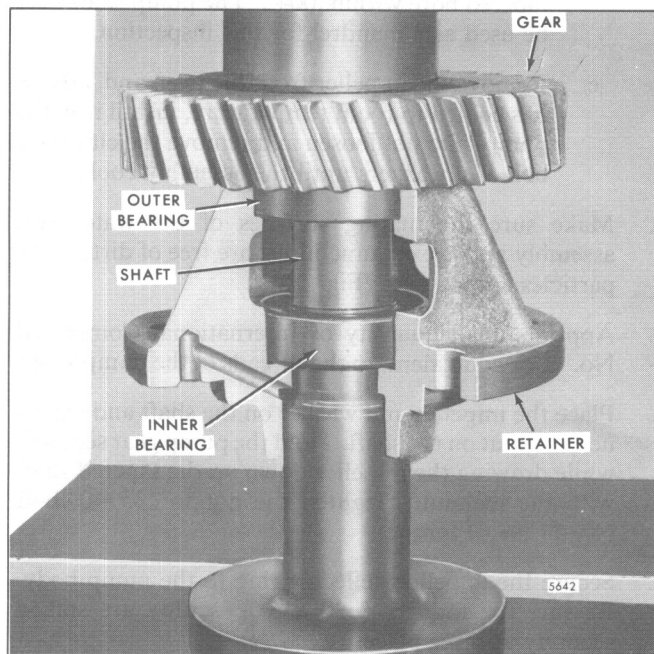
Pressing Gear on 12V-92 and 16V-92 Water Pump Shaft using Tool J 25257
